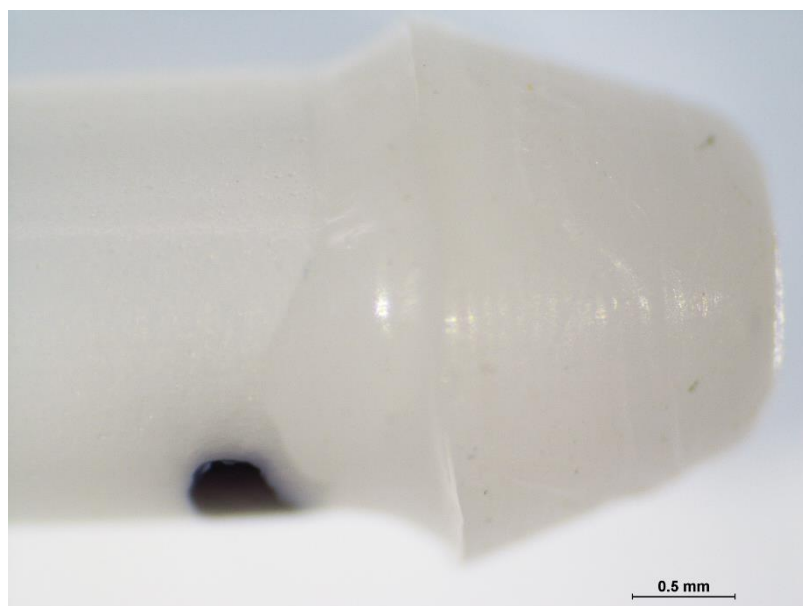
Example of a sealed PCL tube end. The melted plug is shaped and folded down over the end of the tube.
